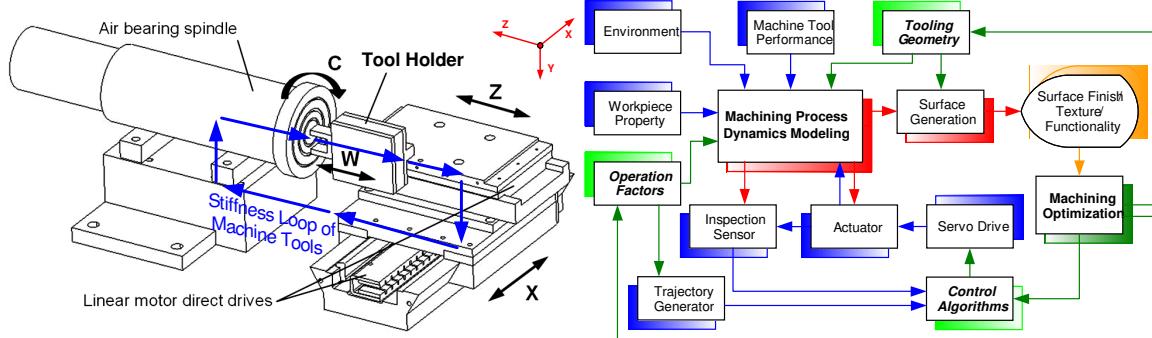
Stiffness Loop of 3-Axis Turning Machine
